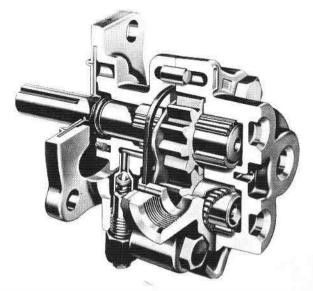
External gear motor. (Courtesy of Webster Electric Company, Inc., subsidiary of STA-RITE Industries, Inc., Racine, Wisconsin.)
